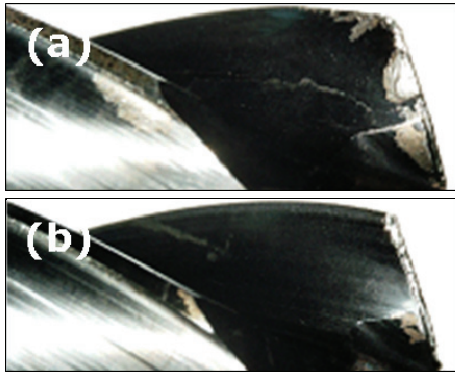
Worn drill after machining, (a) 870°C-25% specimen (b) 870°C-20% specimen
